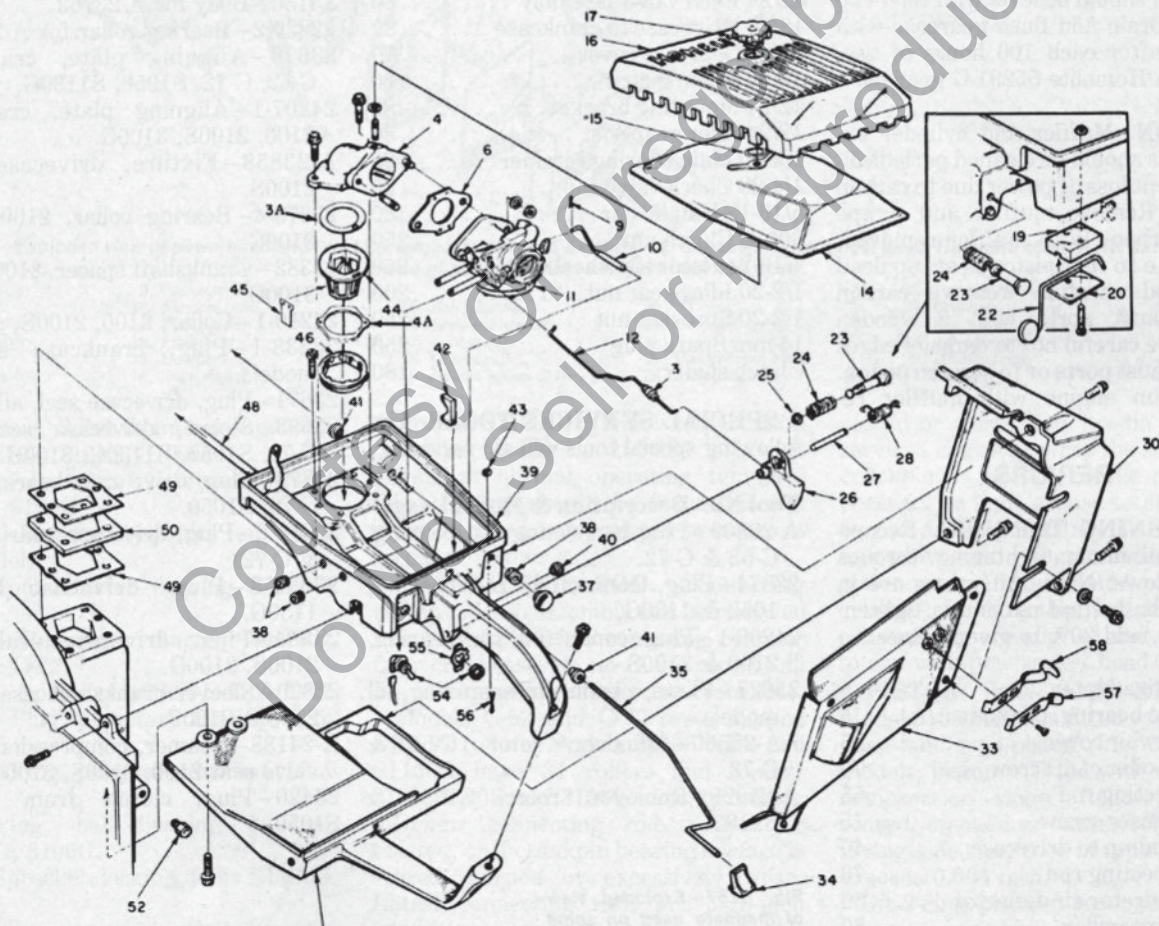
Exploded view of typical air box and throttle assembly used on Models 2100, 2100S and 3100G. Compression release and throttle lock mechanism is shown in inset at upper right. Early models did not use gaskets (3A and 4A); do not install gaskets on early models unless a new intake manifold is also installed.
